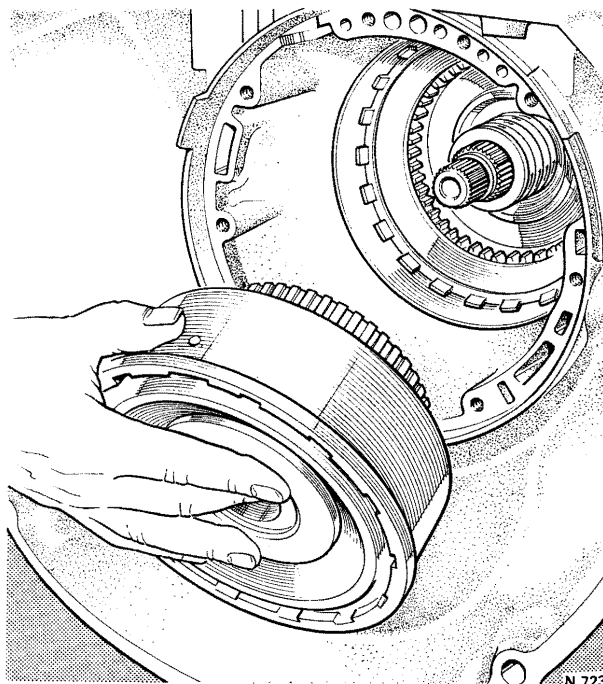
REMOVING THE DIRECT CLUTCH AND INTERMEDIATE SPRAG ASSEMBLY
